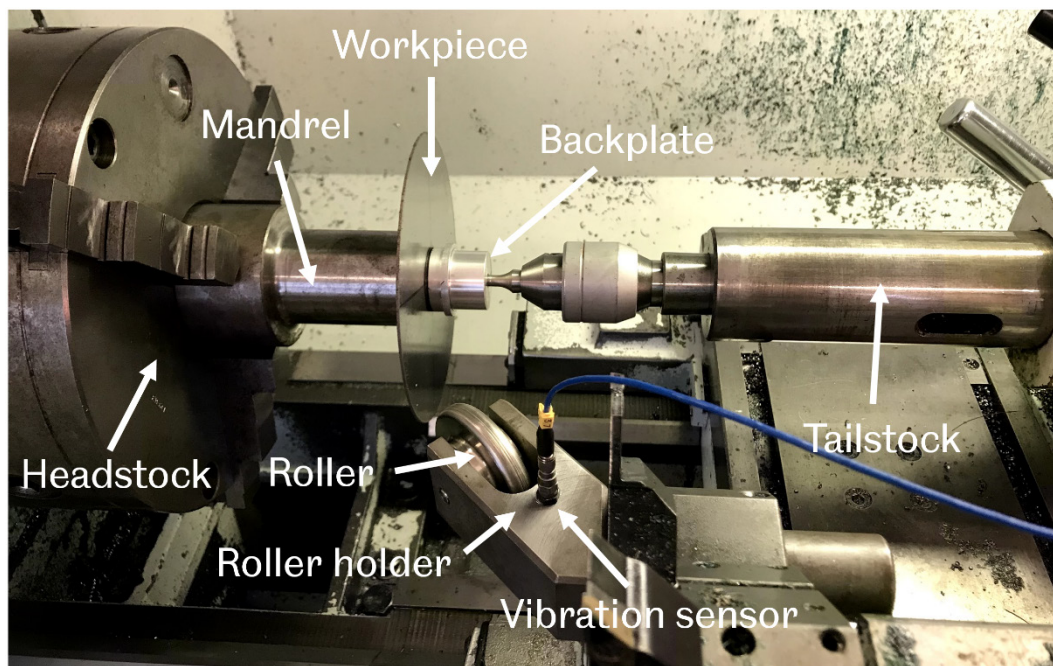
The setup of the shear spinning process on the CNC turning machine.
